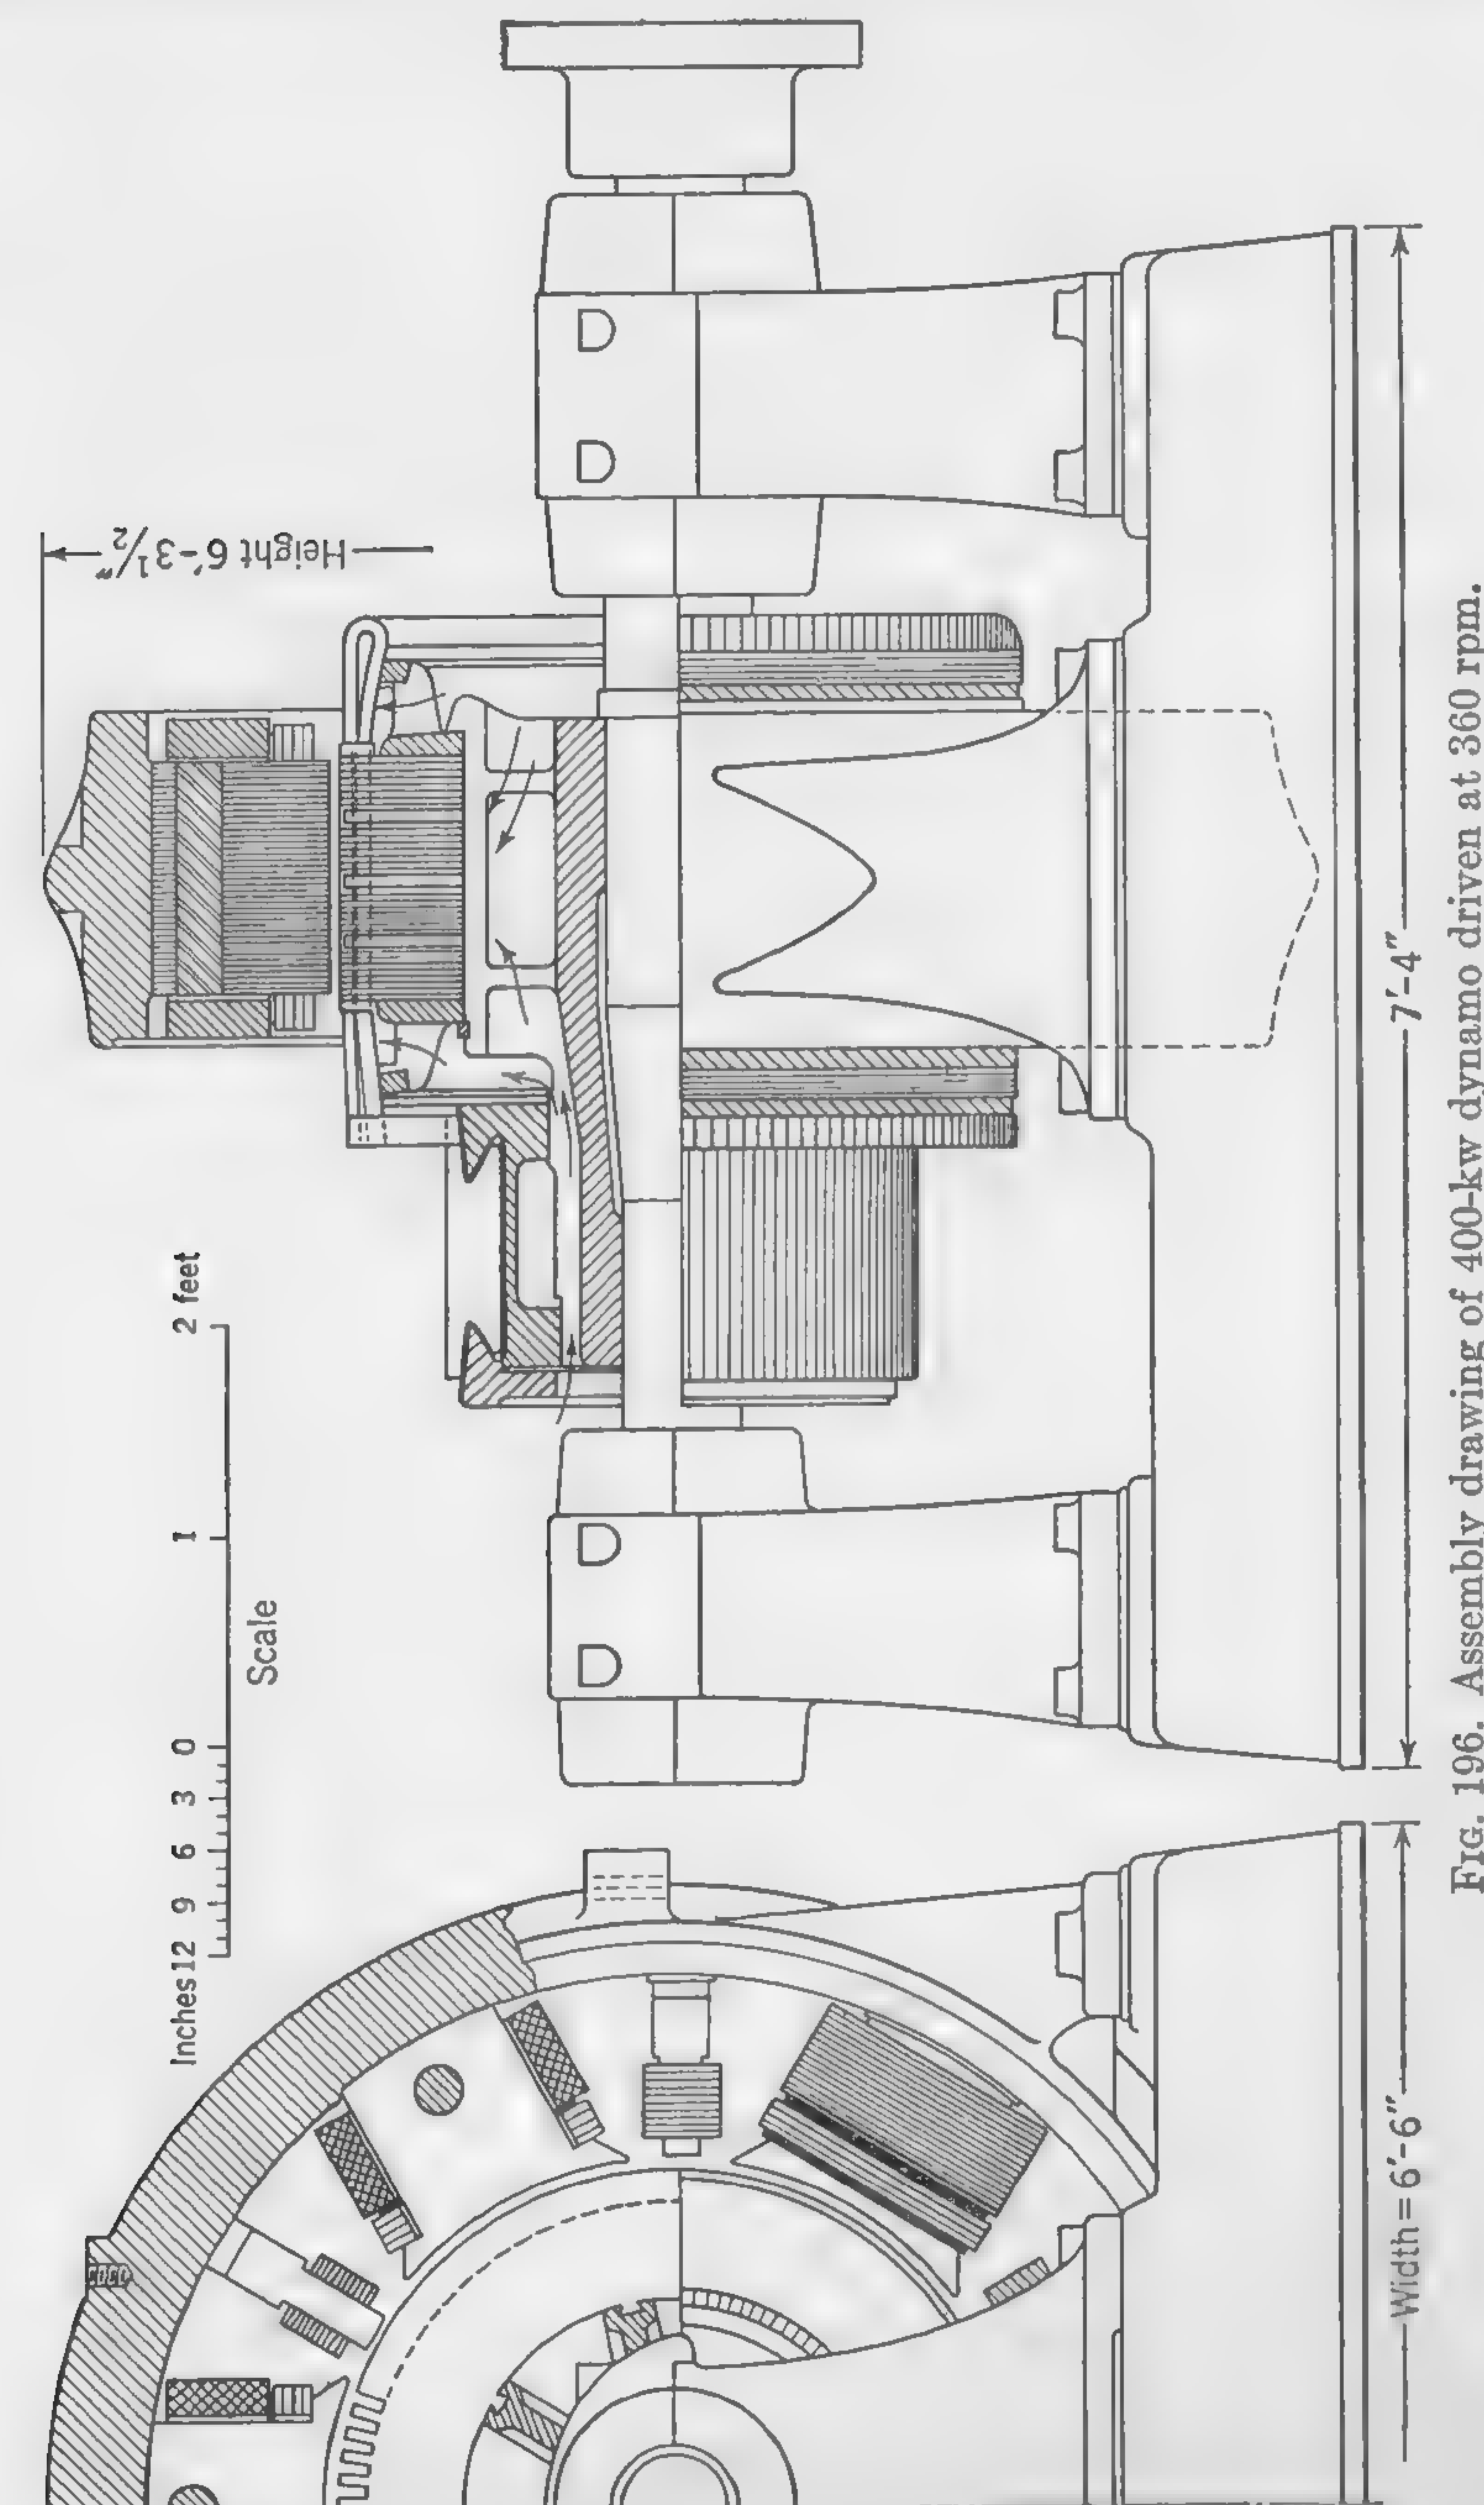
Assembly drawing of 400-kw dynamo driven at 360 rpm.
